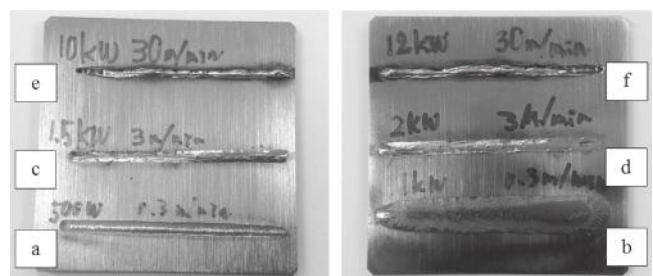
Top view of the welds: (a) C1, (b) C2, (c) K1, (d) K2, (e) K3 and (f) K4.
